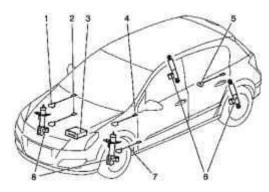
System Components (CDC): 1 - front right sensor on a body (acceleration body), 2 - right sensor spring supports (the acceleration of the wheel), 3 - control unit CDC, 4 - front left sensor on a body (acceleration body), 5 - rear sensor on the body (acceleration body) 6 - rear shock absorber CDC; 7 - Left sensor spring rack (wheel speed) 8 - rack front springs CDC
